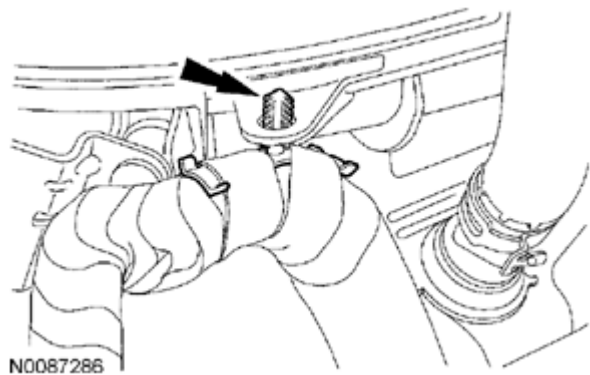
Locating Wiring Harness Retainer Of Upper Intake Manifold
